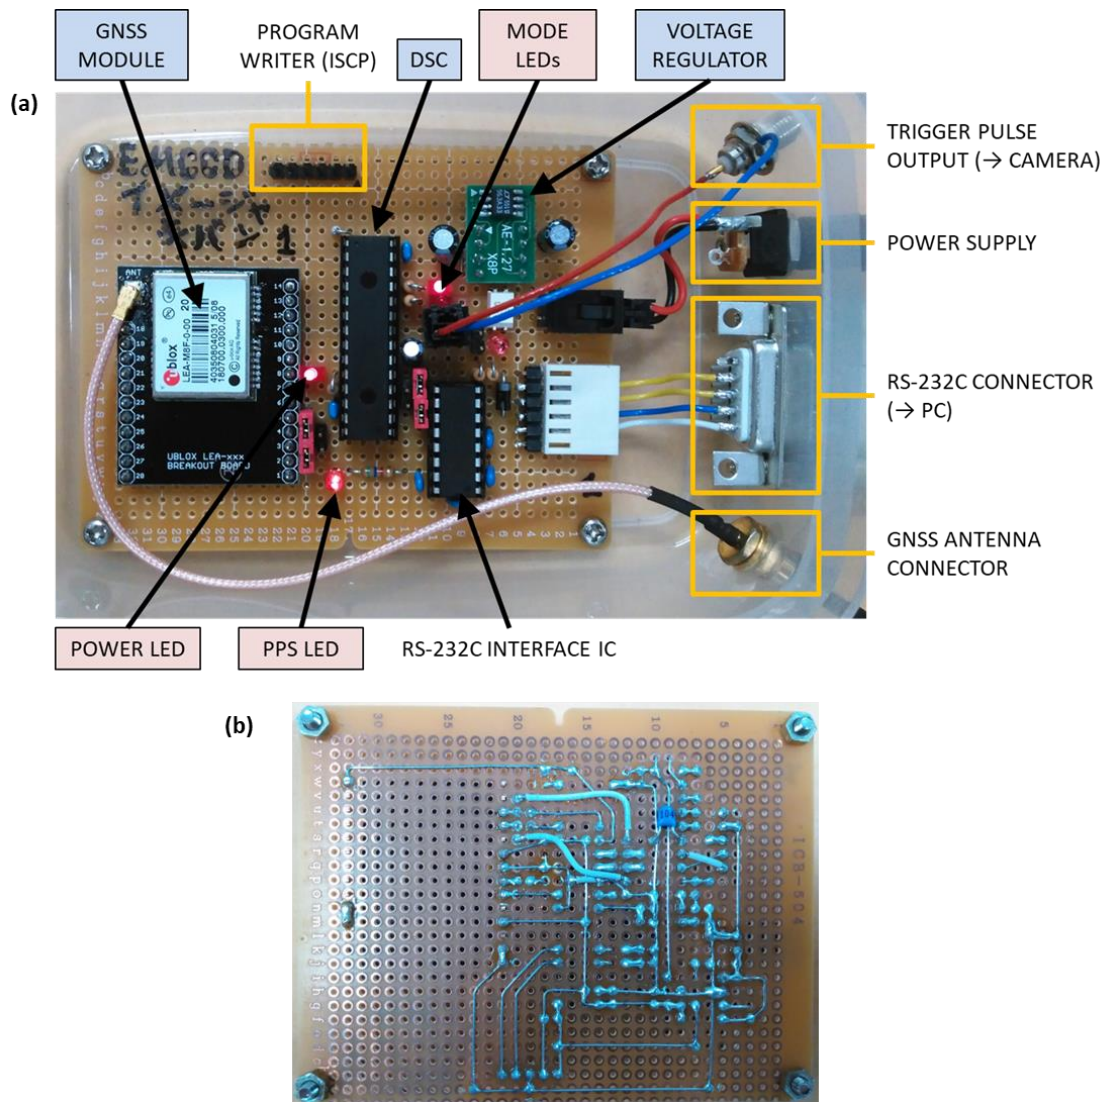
(a) Surface and (b) rear of the operating UTC-board.
